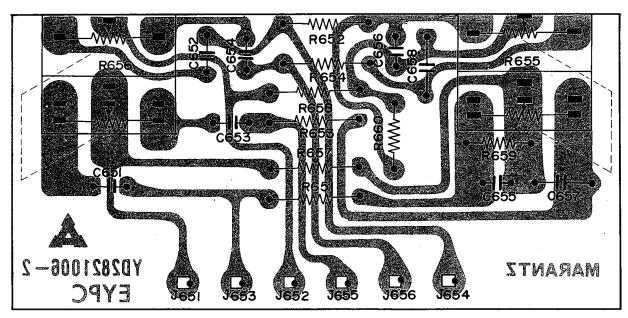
Tone Control Volume Unit Assembly P650 Component Locations
